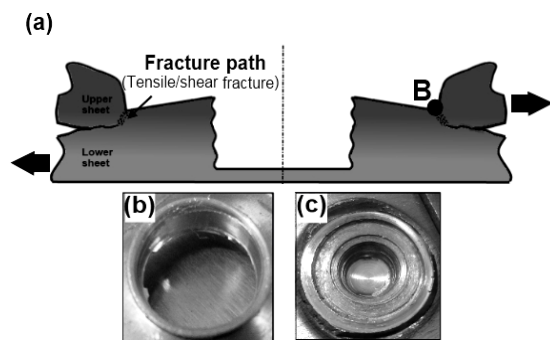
(a) Schematic of the crack propagation path under tensile shear loading in tensile shear fracture mode and also the top view of sheets after final fracture in (b) upper sheet; (c) lower sheet at 1000 rpm rotational speed and 0.7 mm shoulder penetration depth. The arrows indicate the loading direction.
